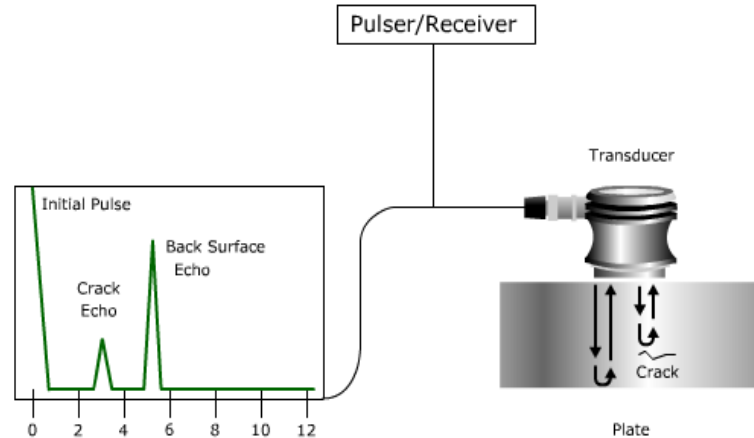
General ultrasonic inspection principle (www.ndt.net)
